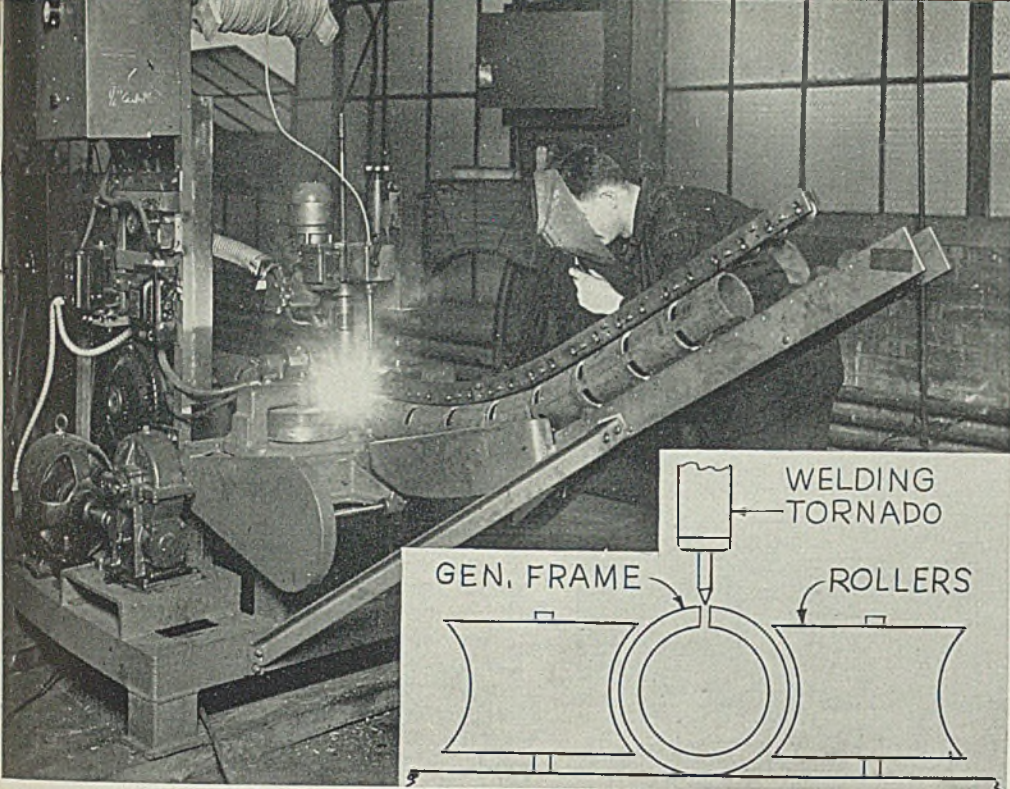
Automatic shielded carbon arc process employed in welding motor and generator frames, often with adding filler metal. Inset shows position of welding head, rollers and work
